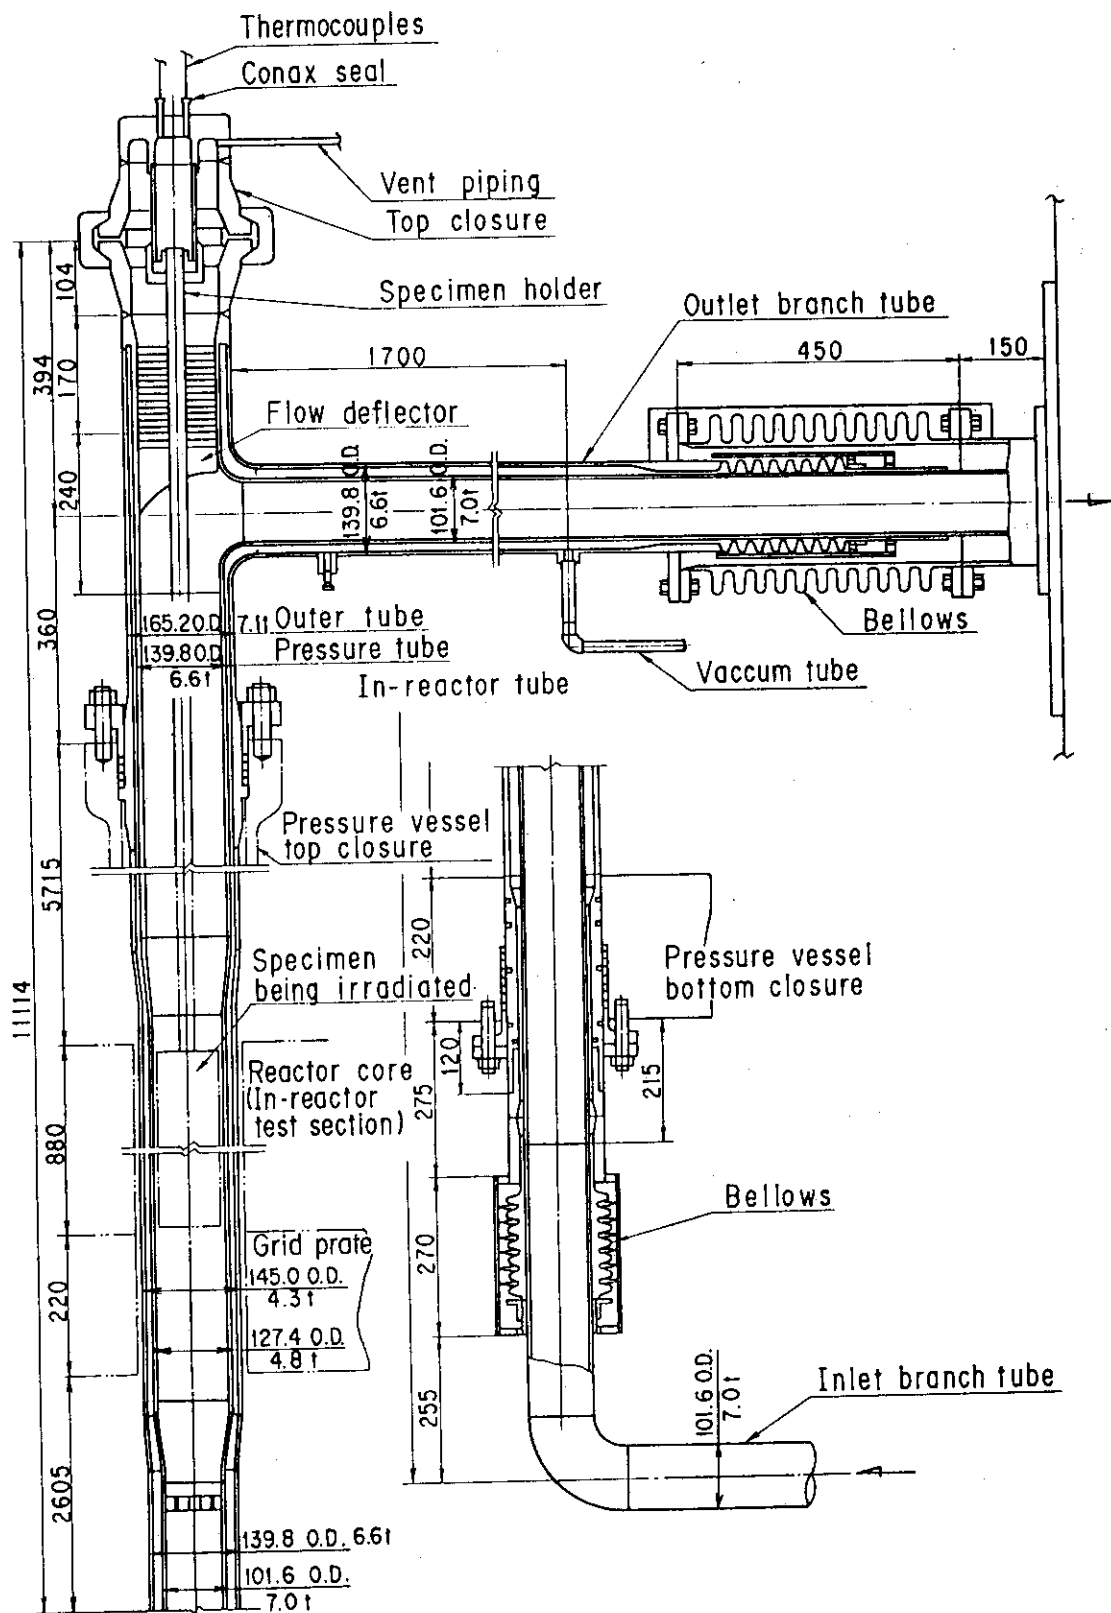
Detailed axial sectional view of the OWL-2 in-reactor tube
